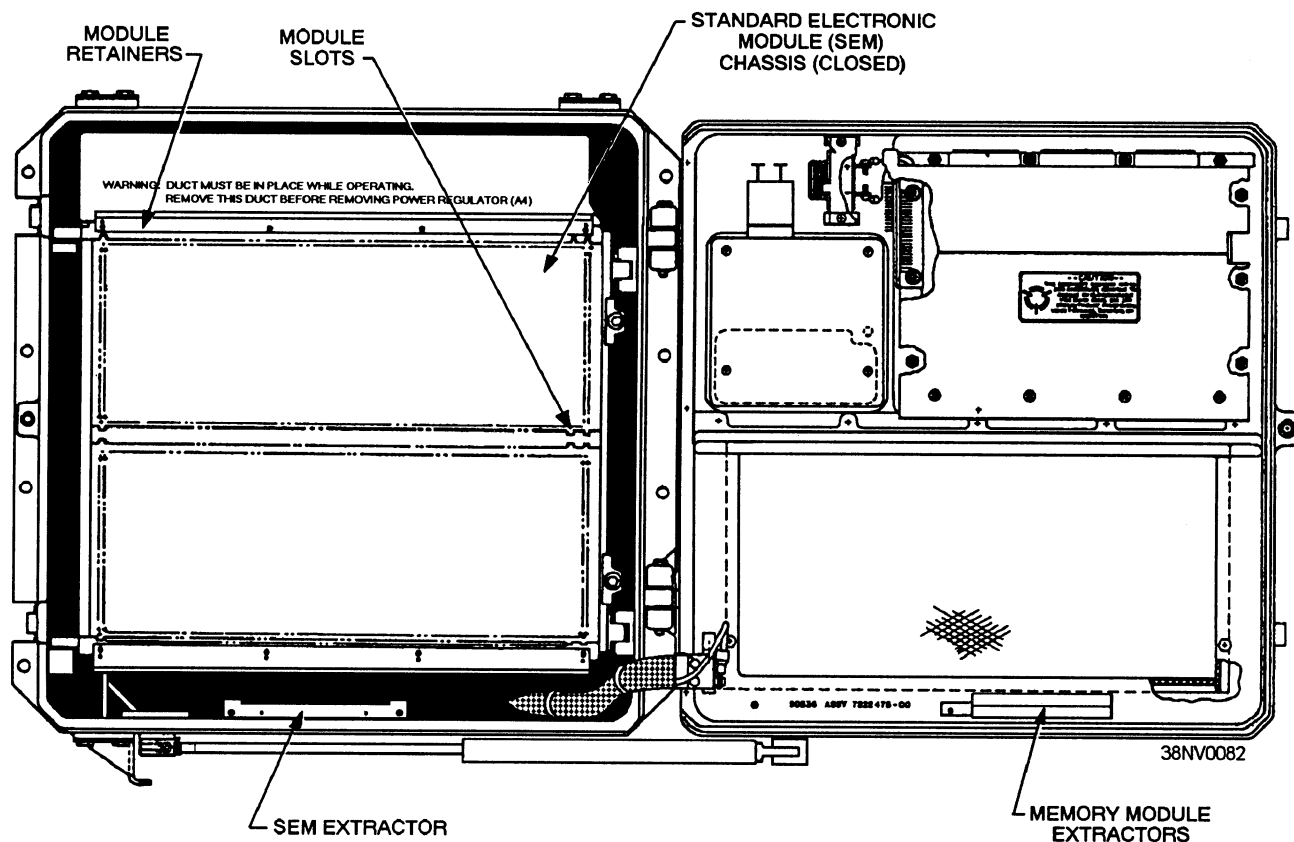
Example of a chassis- or assembly-designed computer.
